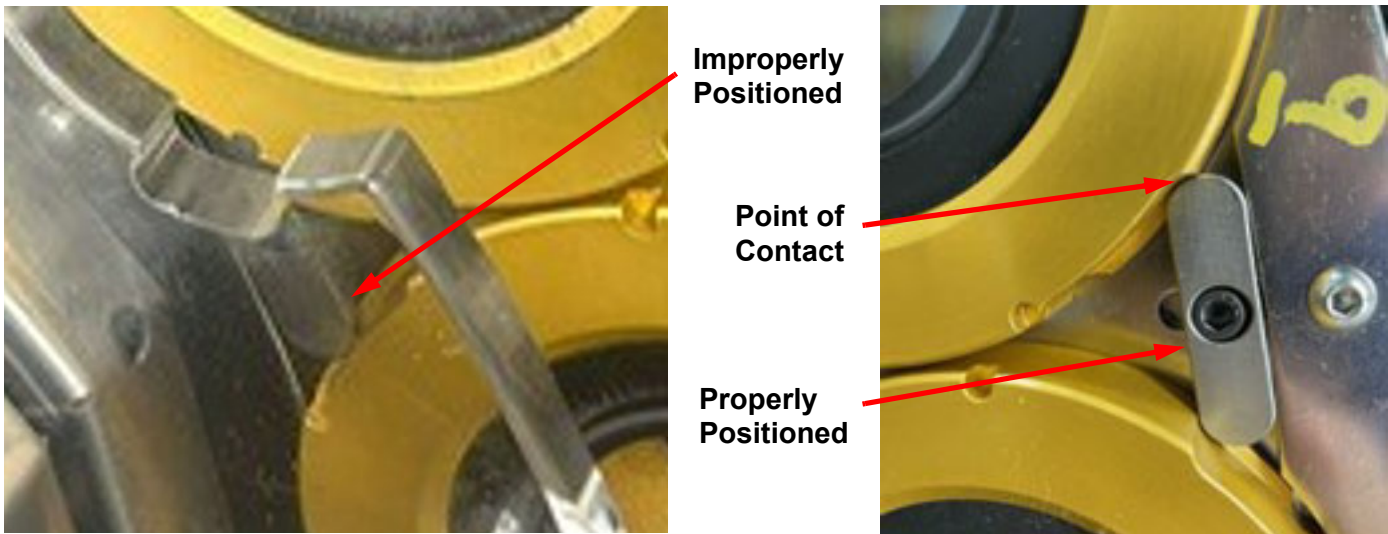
Improperly and Properly Positioned Seal Puck Lock Block
